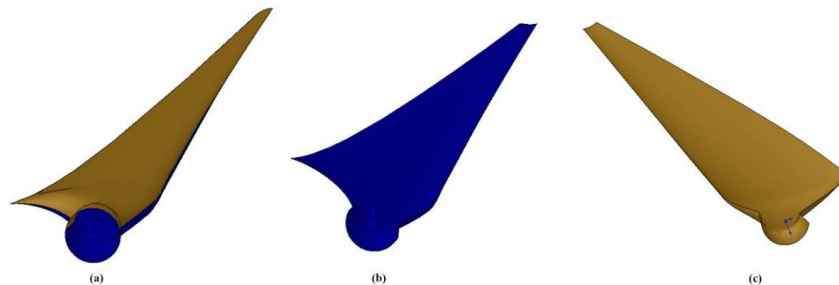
CAD model of (a) 9-meter blade split into (b) LP mould and (c) HP mould
